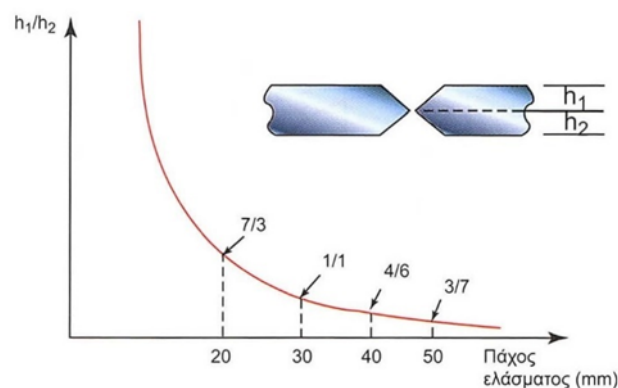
Weld edge configuration to achieve minimum angular change
